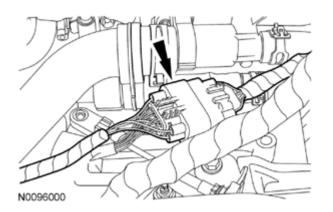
Locating Engine Wiring Harness Electrical Connector Courtesy of FORD MOTOR CO.
